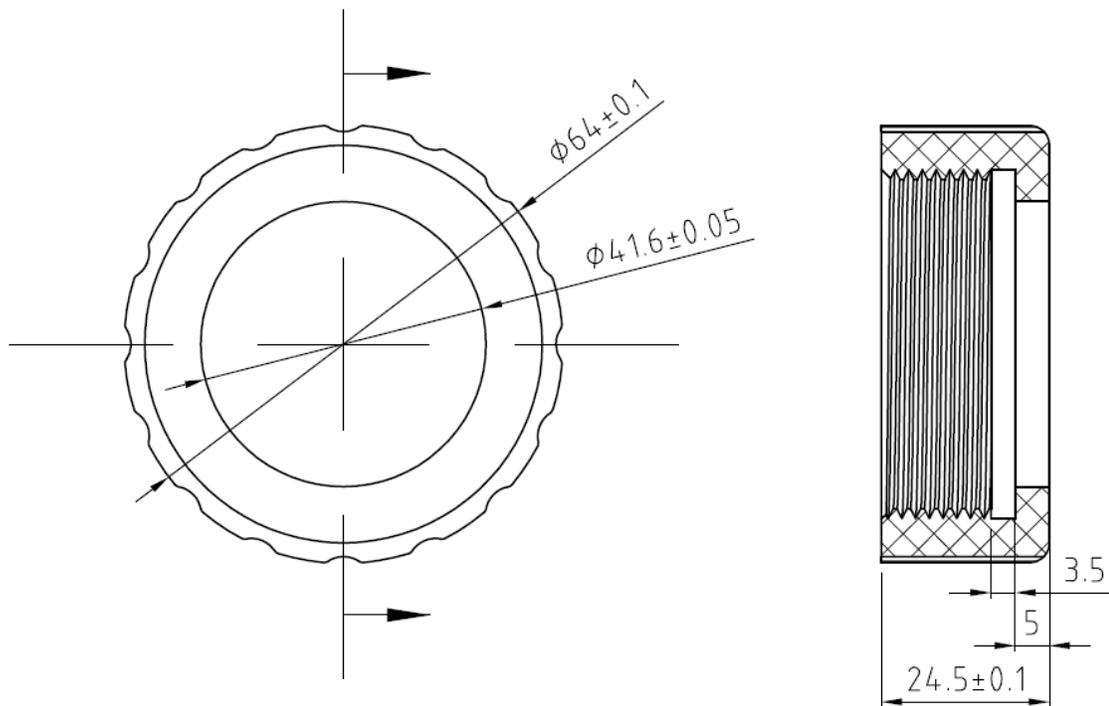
Dimension of the ST-500W Universal NUT Tee Assembly (mm)
